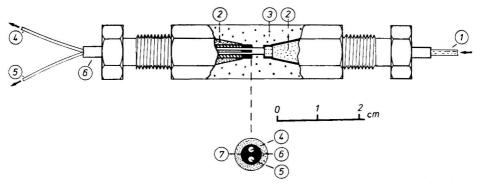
Design of the outlet splitter. 1 = Glass capillary; 2 = 1/16-in. Swagelock GC ferrules; 3 = Swagelock GC union; 4, 5 = Pt-Ir capillary tube; 6 = 1/16-in. steel capillary tube; 7 = seal of silver solder. Below: exploded view of vertical cross-section of te splitter.
